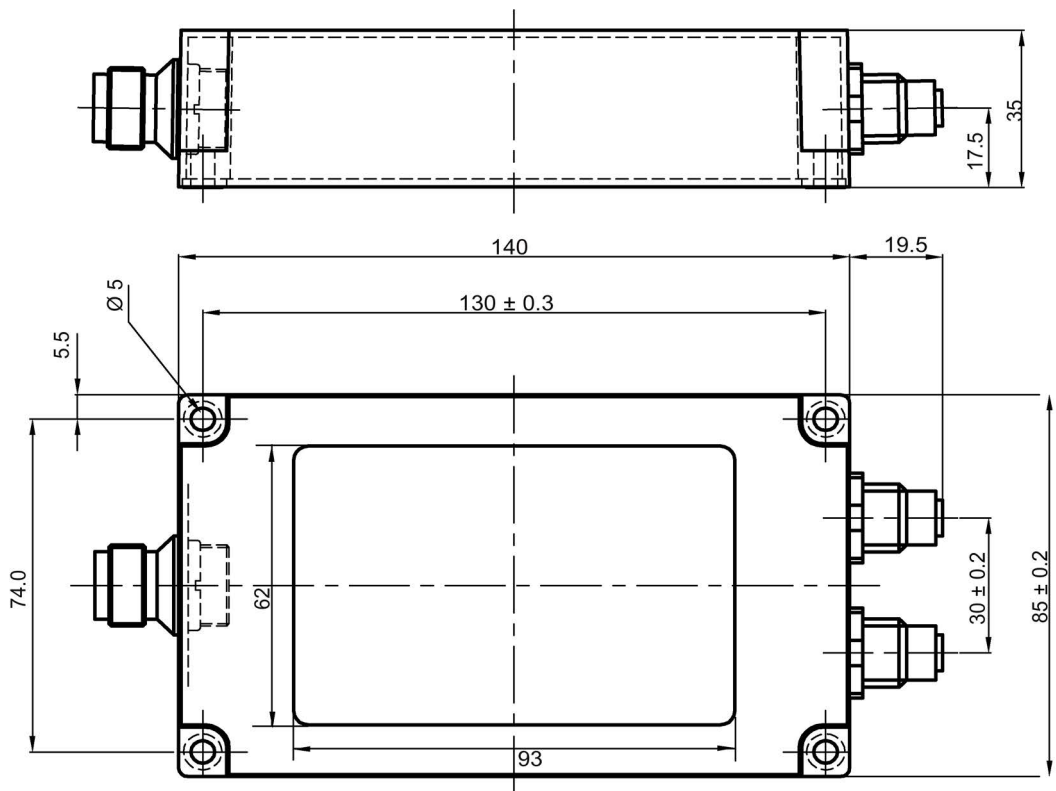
Dimension drawing wide-range power supply unit for SIMATIC RF systems (all dimensions in mm)
